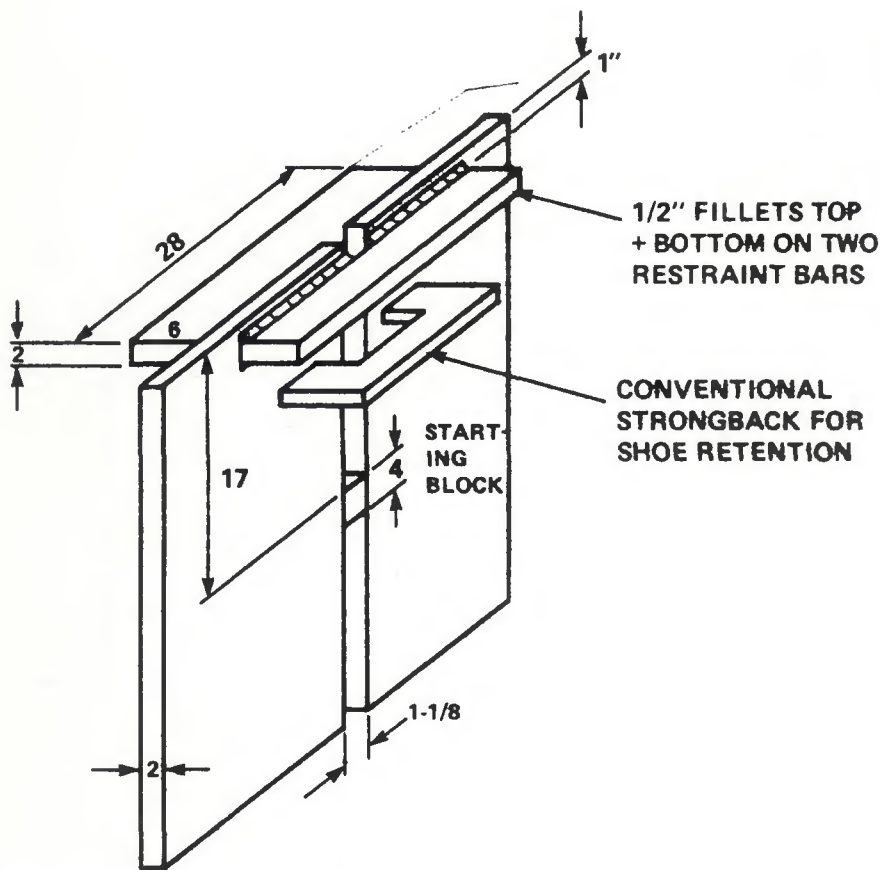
Fixturing for weldment with restraint bars. All dimensions in inches
